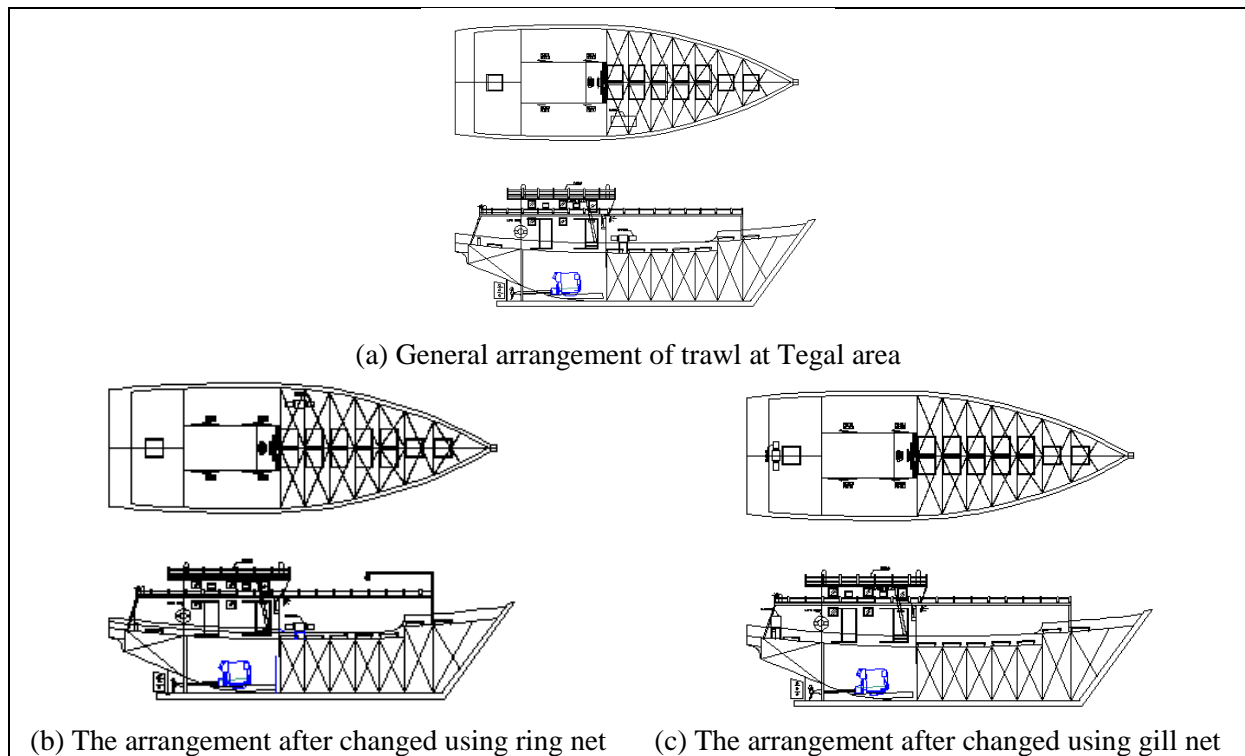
The ship's general plan layout plan after reconstruction at Tegal area.
